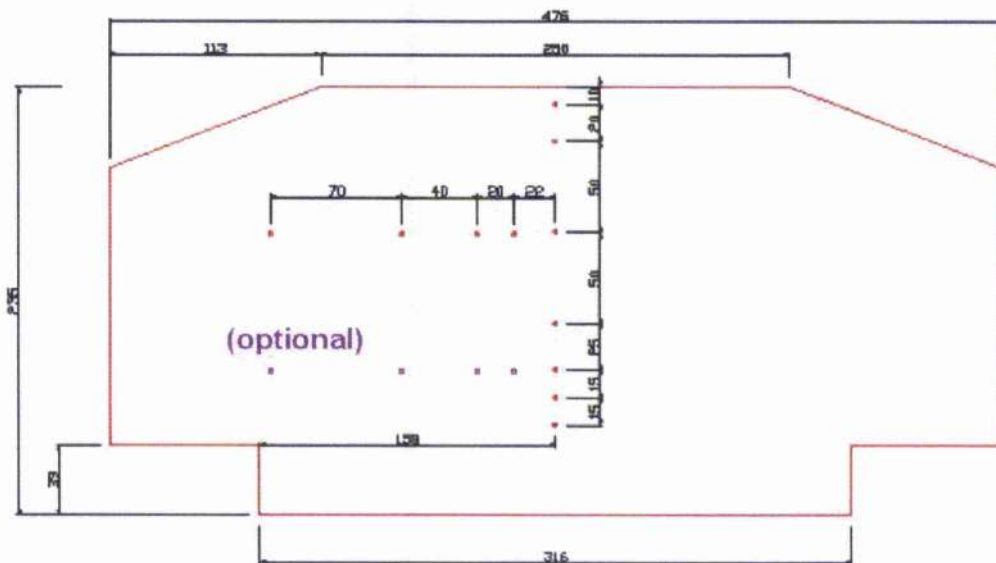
CAD Drawing for Revised Positions on Rear Face
